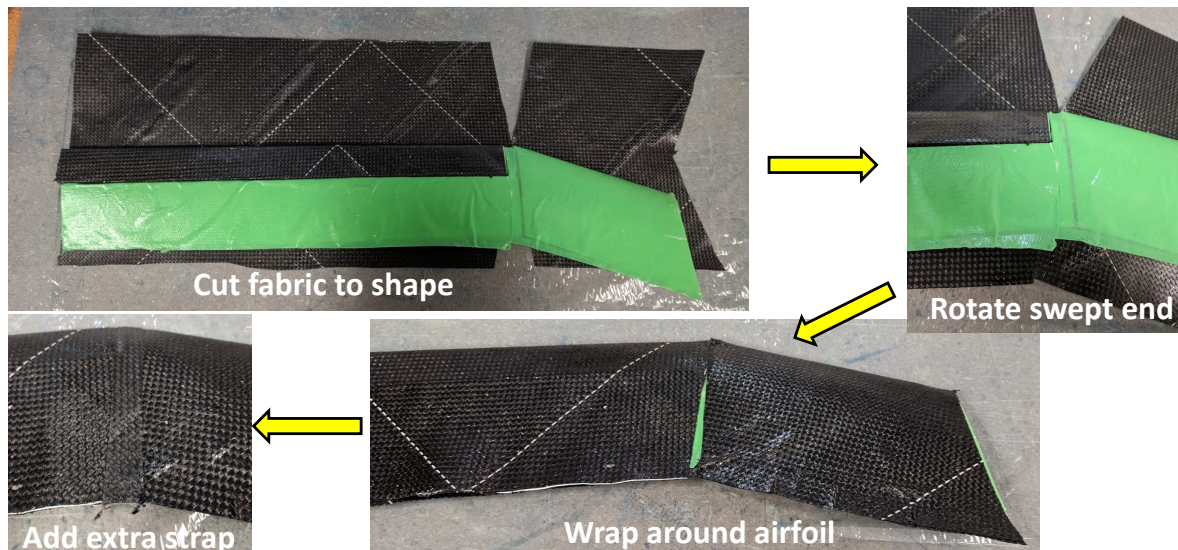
Ply lay-up on the swept tip section using the chord-wise cut method; integration/assembly with inboard main blade lay-up. This step is before curing in the oven.
